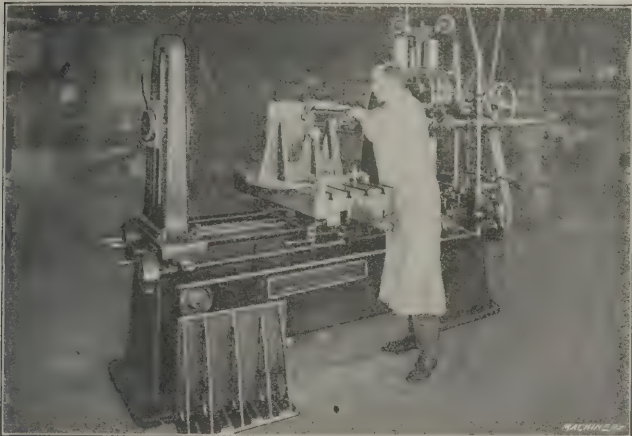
Locating the Spindle laterally for Boring a Fixture
